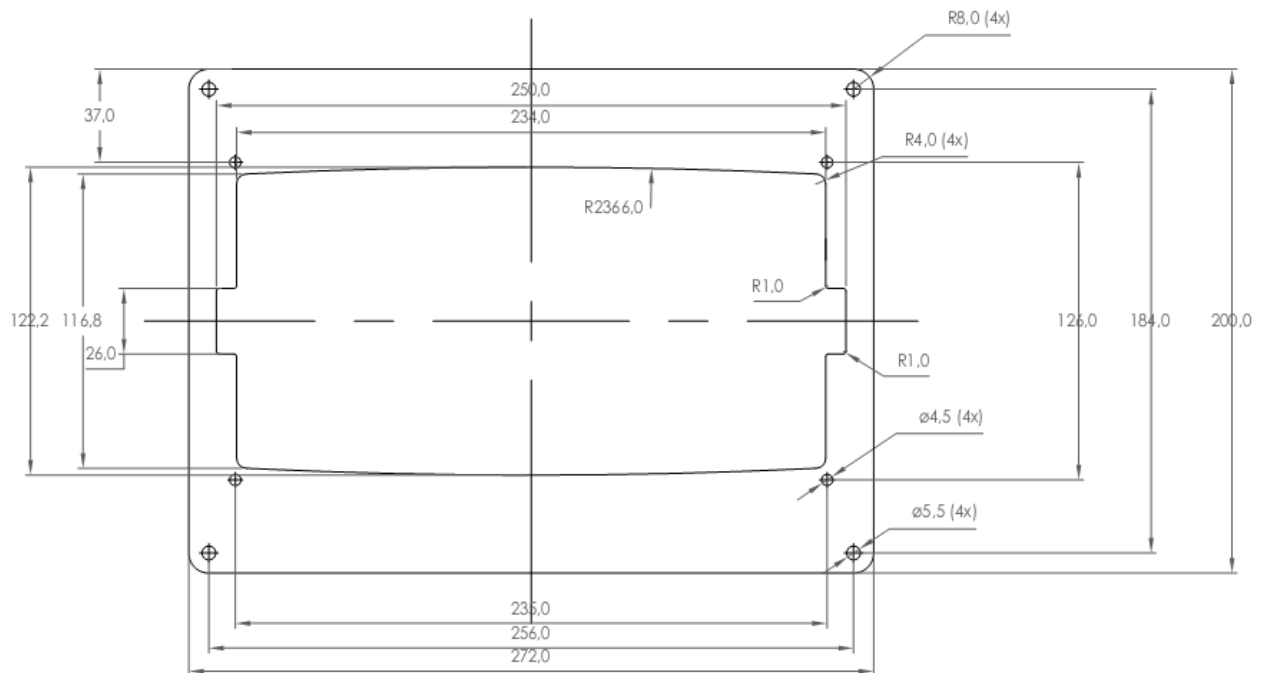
R5 SUPREME CDU, Mounting frame dimensions
